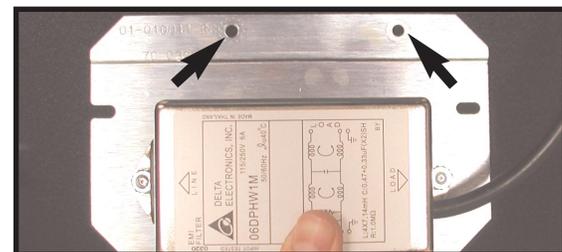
In-line power filter assembly. Two holes mount over available studs (3601).
